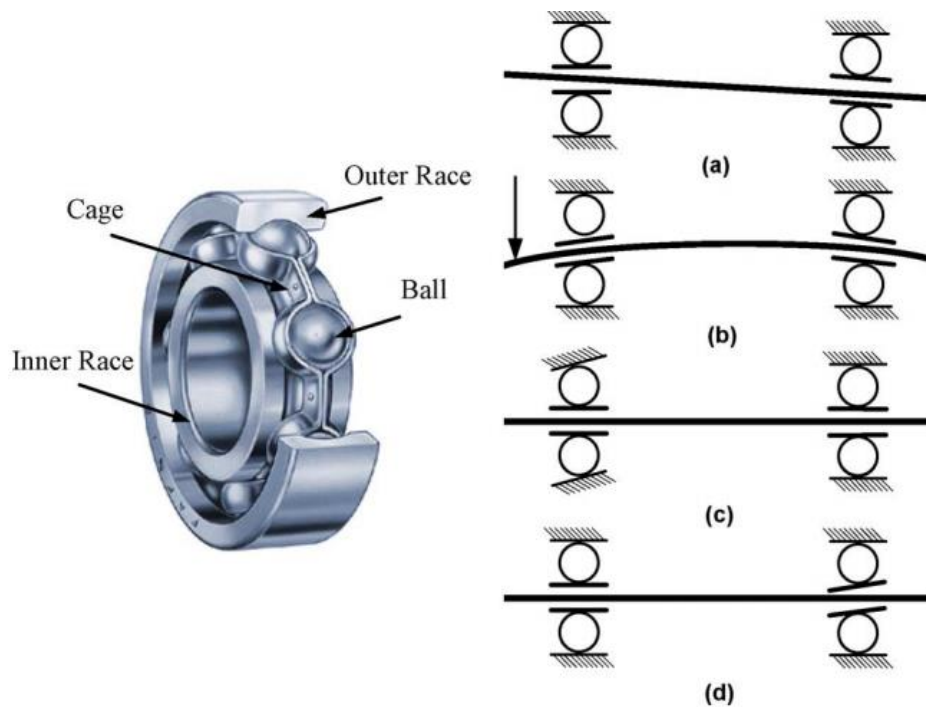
Failures of the bearing – (a) misalignment (b) tilted shaft (c) outer race tilted (d) inner race tilted [15]
